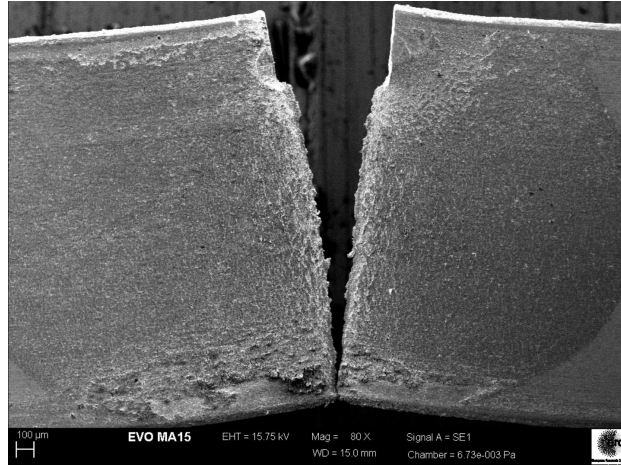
Crack path at failure of the specimen with $a_0 = 0.45$ mm notch size.
